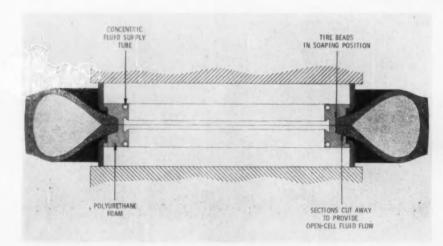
Polyurethane foam tire soaper fixture used by one automobile manufacturer for applying soap solution to tire beads to facilitate assembly to the rim.
